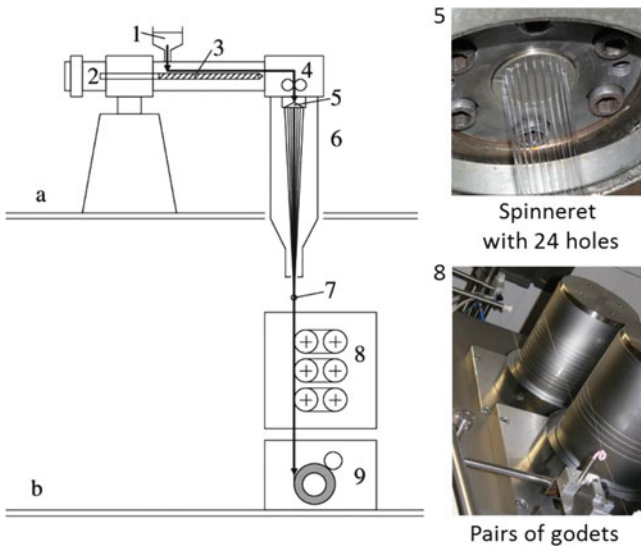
Melt spinning equipment (schematic): (a) spinning floor; (b) winding floor. (1) Container with polymer pellets, (2) electric motor and drive train, (3) extruder assembly with screw, (4) spinning head with metering pump (gear pump), (5) spinneret with capillary holes, (6) spinning chamber with quenching air, (7) spin finish applicator, (8) pairs of (heatable) godets for online drawing, (9) (high speed) winder. From [52]; corresponds to the melt spinning equipment at Leibniz-Institut für Polymerforschung Dresden e. V.
